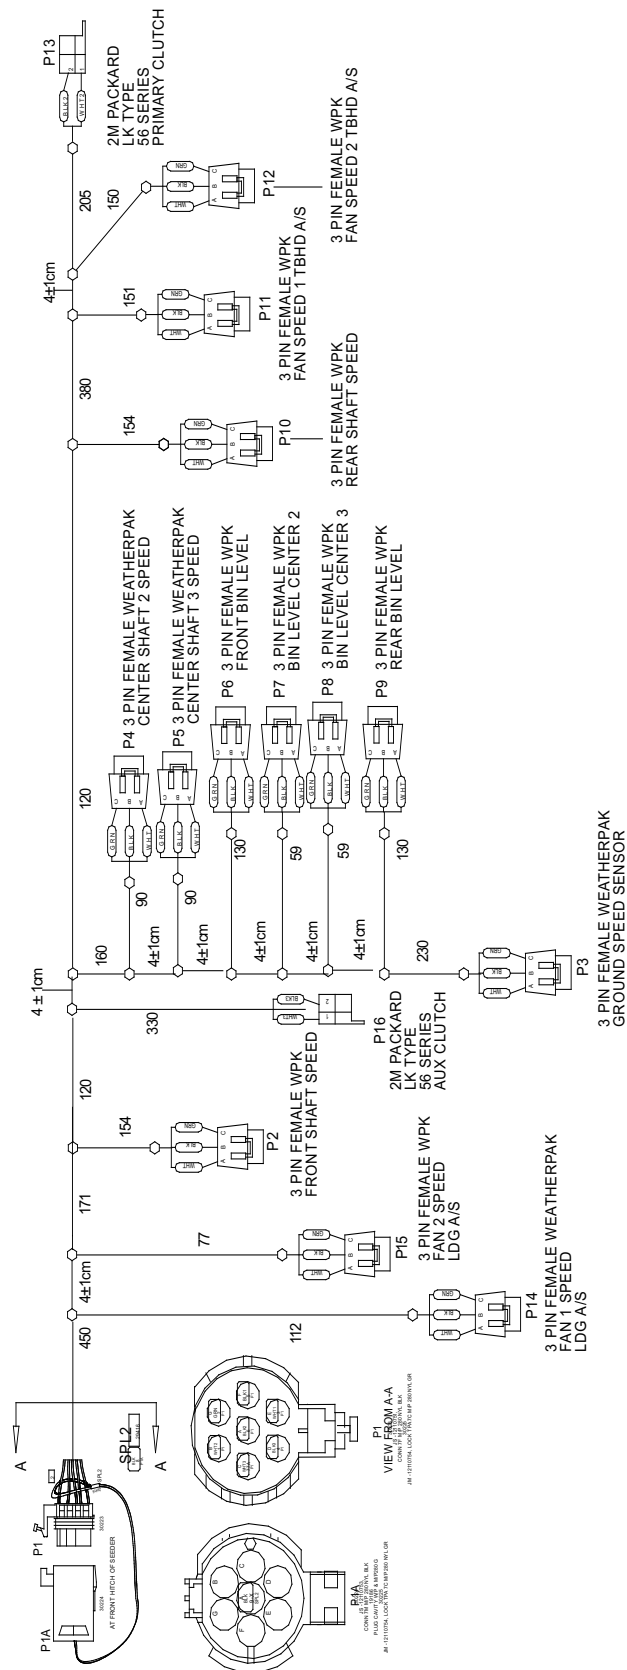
Air Seeder Extension Harness for the Monitor (Across the AIR SEEDER Chassis) - 3120-89-03
